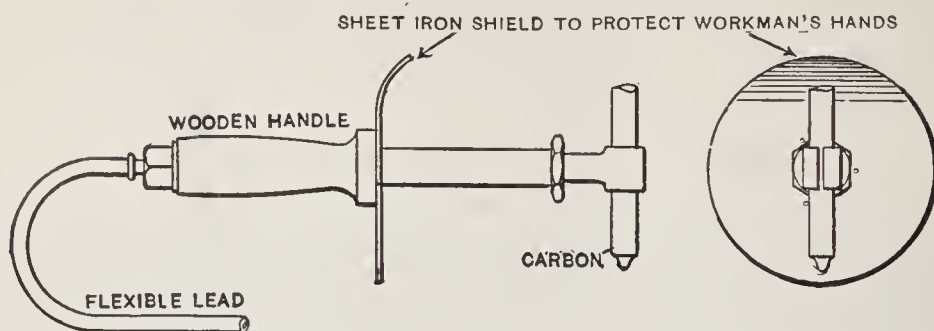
Carbon rod mounted on handle with protecting shield for use in arc welding.
